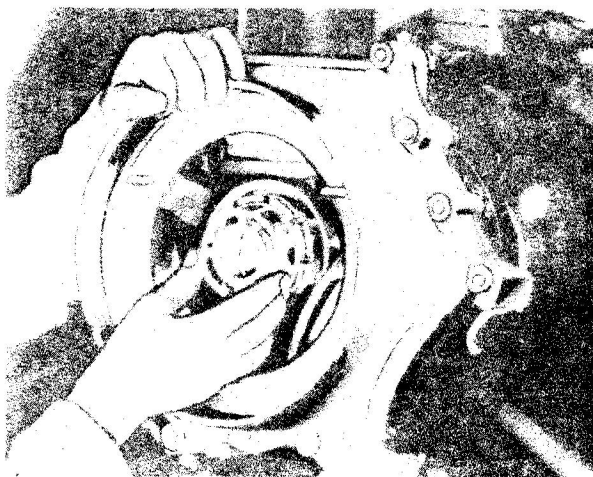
Installing Oil Transfer Plate-Propeller Shaft Gasket
